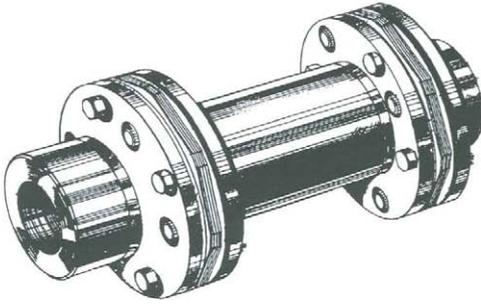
Flexible disc spacer coupling (Courtesy of Rexnord)
